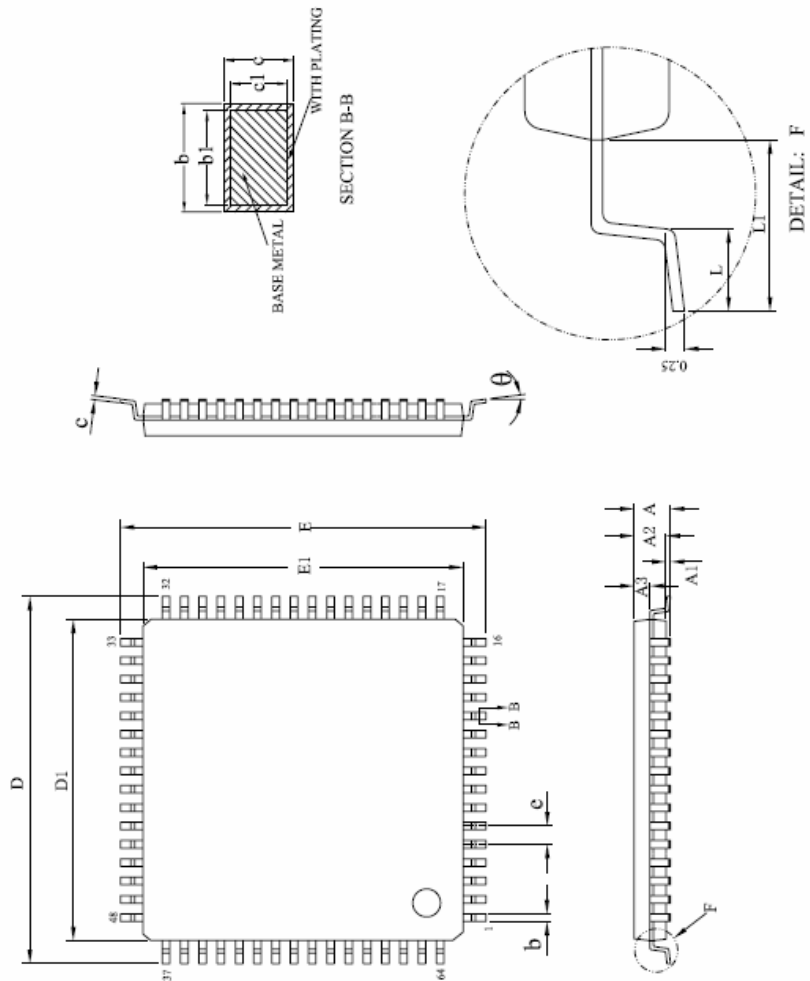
LQFP64-10x10mm Package Dimension Parameter
